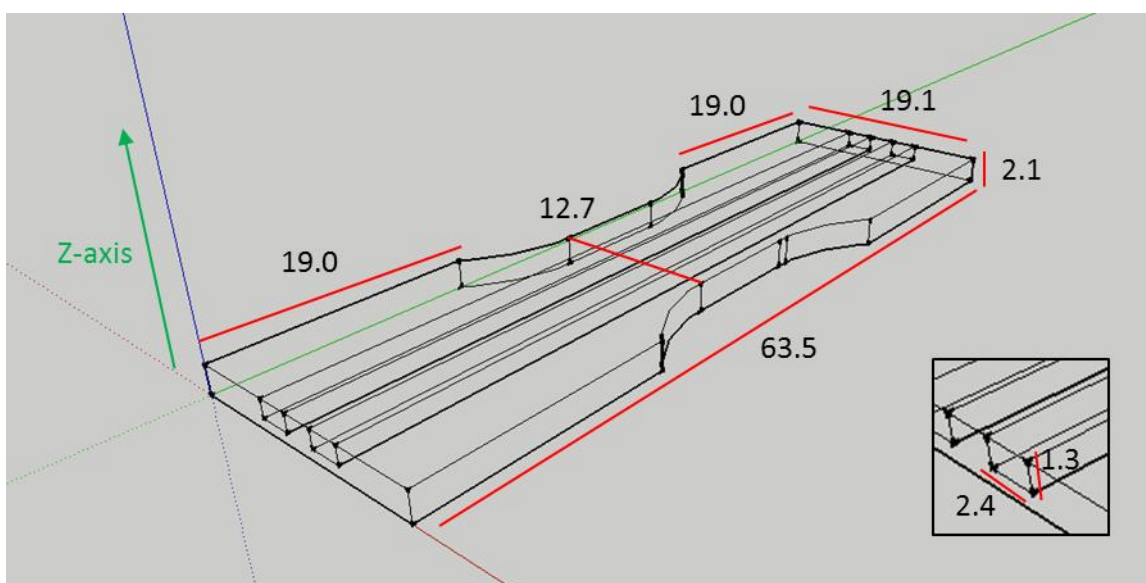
Tensile test specimen used in Figures 4.4 and 4.5. Radius of fillet = 12.7 mm for all curved sections. Listed dimensions are in units of mm.
